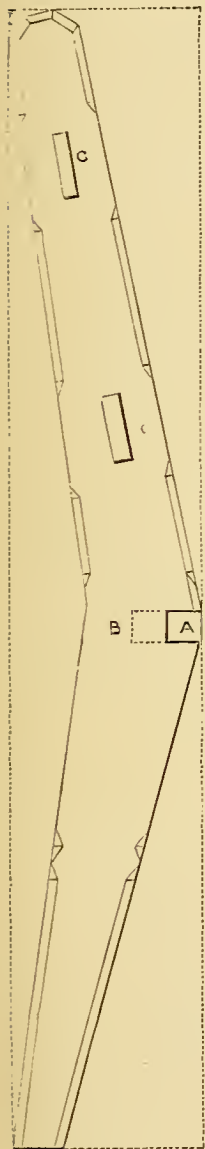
SIDE VIEW OF HIND LEG AND BACK PIECE.
